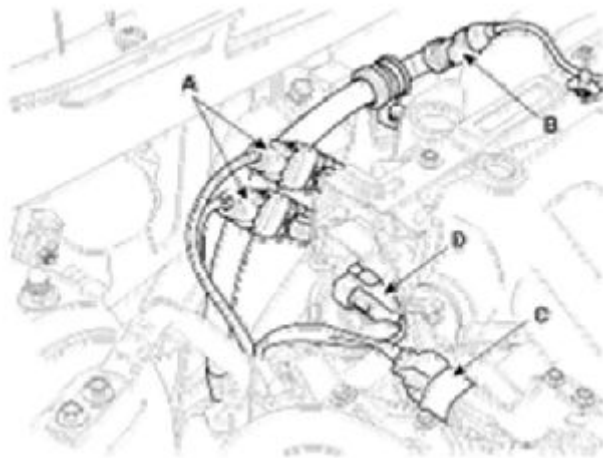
Identifying Rear Oxygen Sensor Connectors
